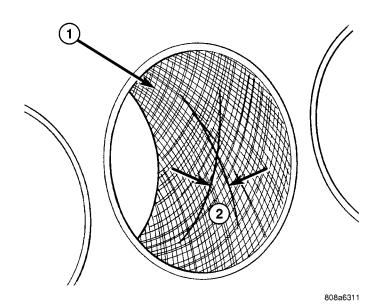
Cylinder Bore Cross-Hatch Pattern
